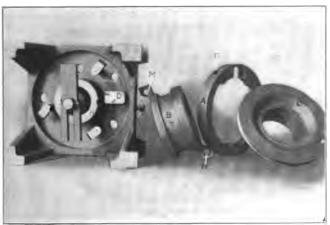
Drill Jig for Parts of Friction Clutches shown at the Right
